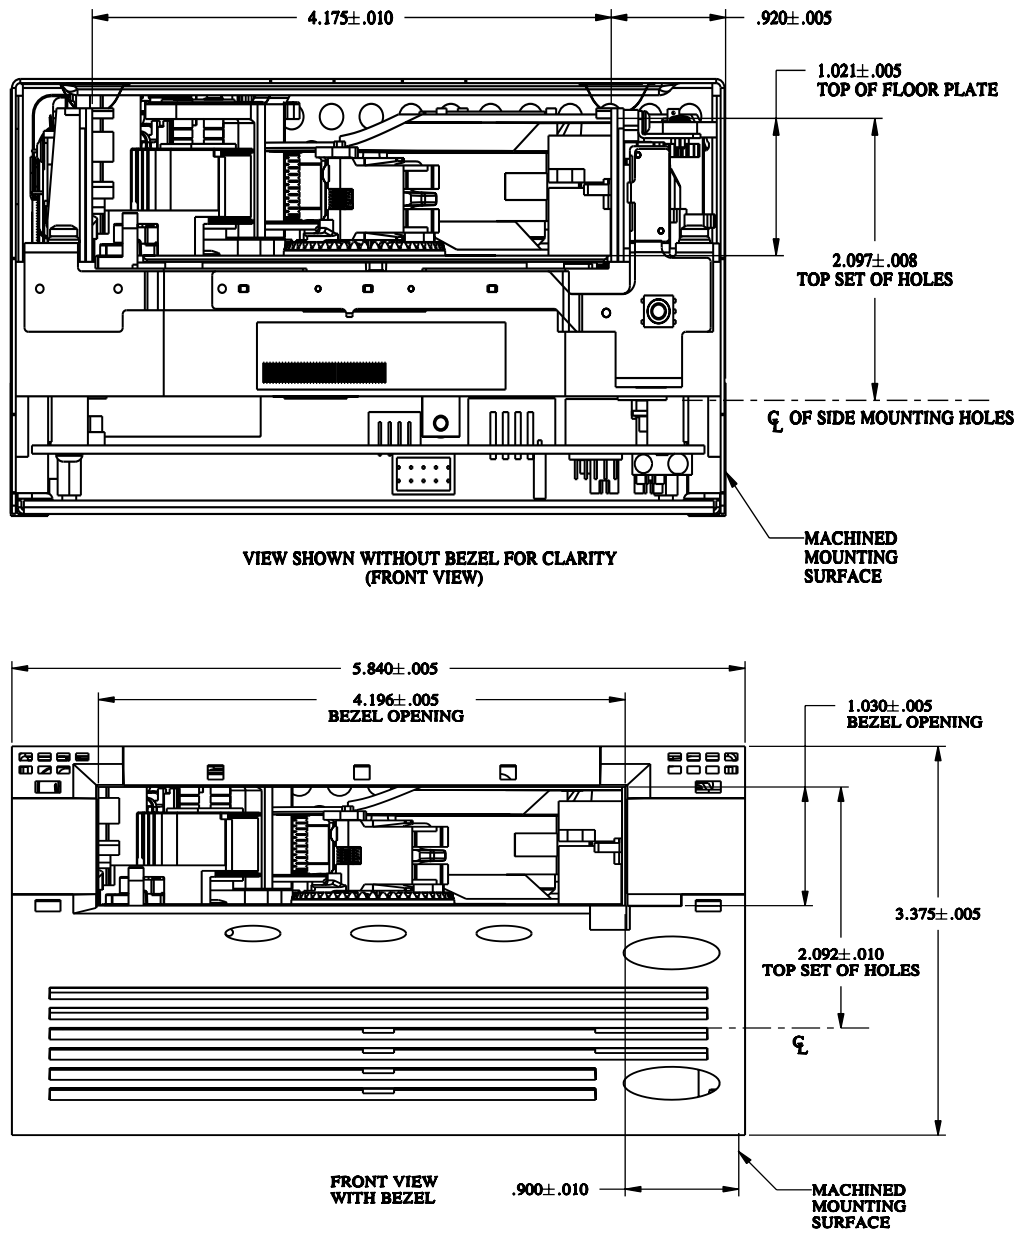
Front Views of SDLT 220/320 Tape Drive
